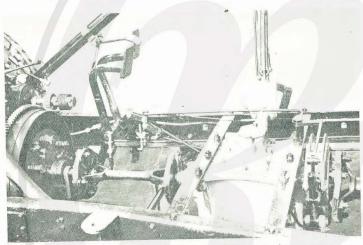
THE 14 H.P. "STANDARD" CHASSIS AMIDSHIPS. Showing the clutch shaft, with flexible joints at each end, connecting the flywheel and gearbox. On the extreme right is the pedal-operated transmission brake.
